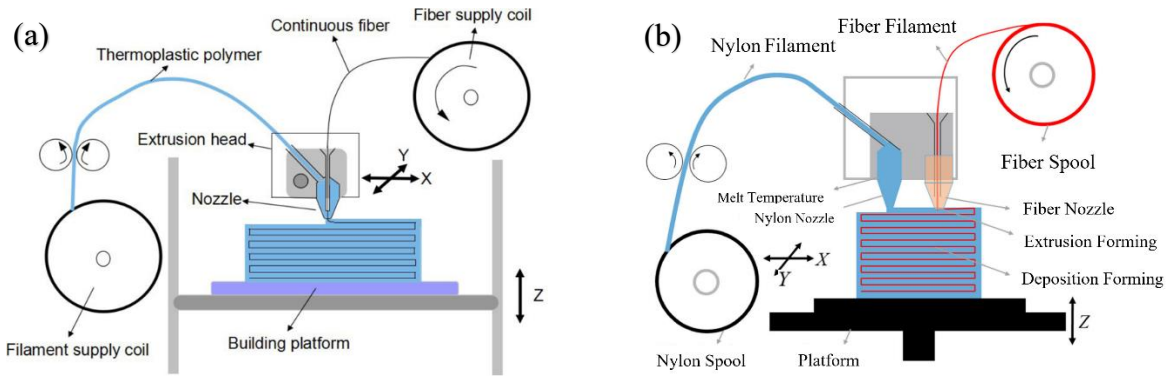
FDM printing process to fabricate continuous FRCs: (a) coaxial extrusion using a single nozzle [94]; (b) dual extrusion using two nozzles [95].
